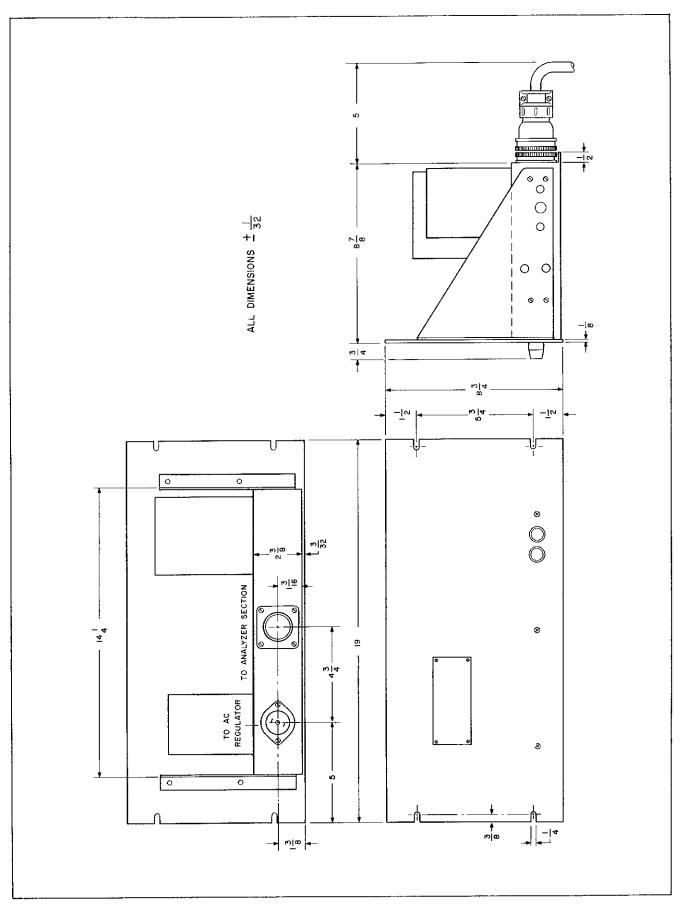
Outline Dimensional Drawing, Model PS-12, Rack Mount Style.
